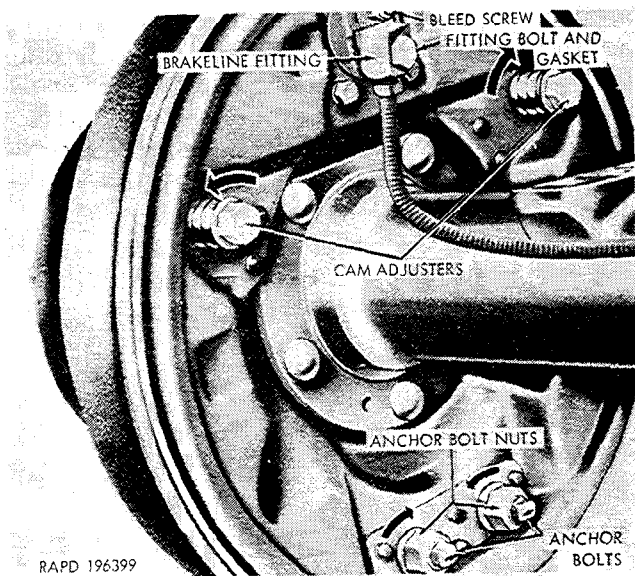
Brakeshoe cam adjusters and anchor bolts.
